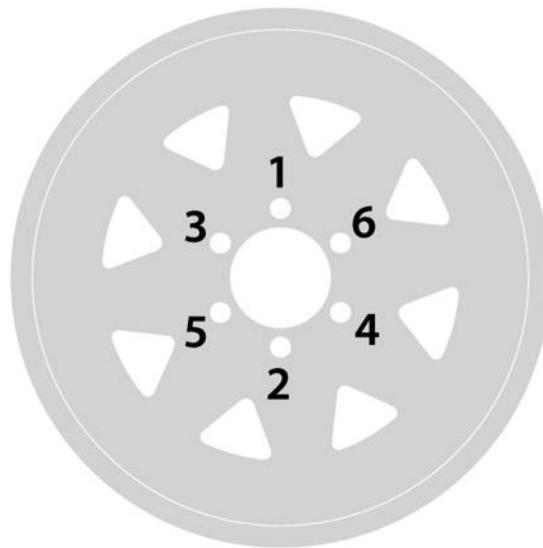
Proper lug nut torque sequence for a six-lug wheel.
